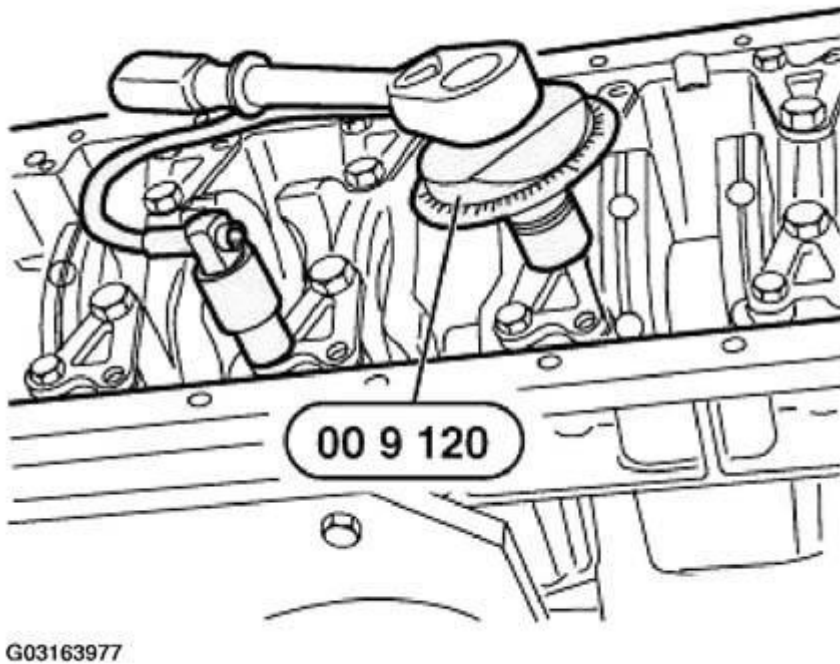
Tightening Down Main Bearing Bolts With Special Tool 00 9 120
